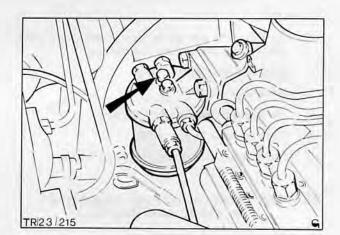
Fuel filter bleed bolt (Air cleaner removed for clarity)
